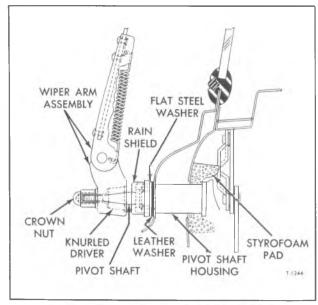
Wiper Arm Installed (Tilt Cab Model)
